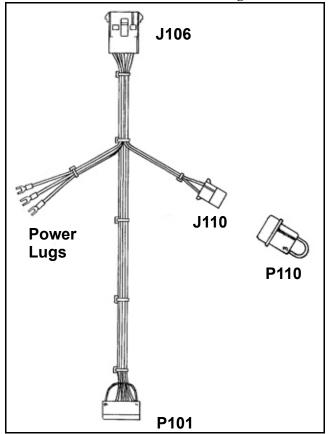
Adapter Cable (Floor Mounted Tubestands Only)
